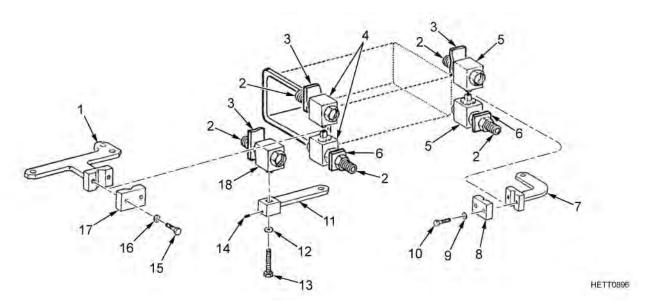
Gooseneck Isolation Valve Assembly Installation.
